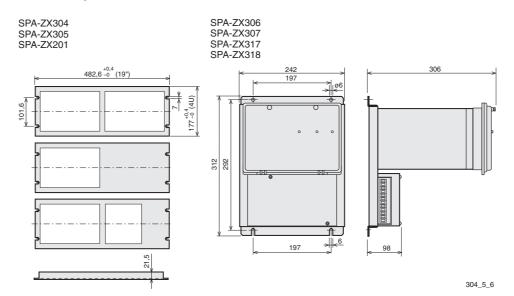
Mounting cabinets and frames as well as projecting mounting (dimensions in mm)
